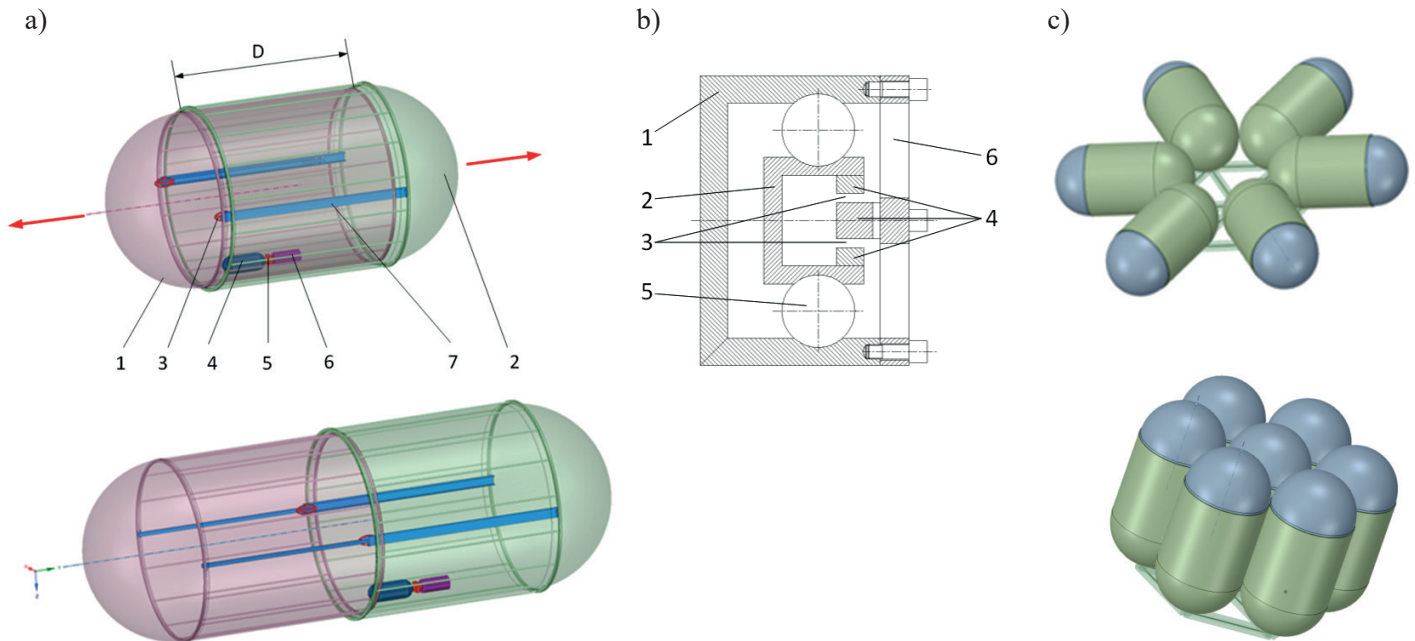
Scheme of HAPS design: a) aerostat in initial and extended form: 1 – inner segment, 2 – outer segment, 3 – piezoelectric actuator, 4 – additional helium tank, 5 – valve controlling helium flow, 6 – compressor; lower drawing – aerostat in extended form, 7 – linear guideway; b) clamping mechanism: 1 – external linear guideway, 2 – internal linear guideway, 3 – clearance, 4 – friction lining, 5 – bearing balls, 6 – amplified piezoelectric actuator (APA), c) HAPS assembled from numerous Heli-Caps modules
